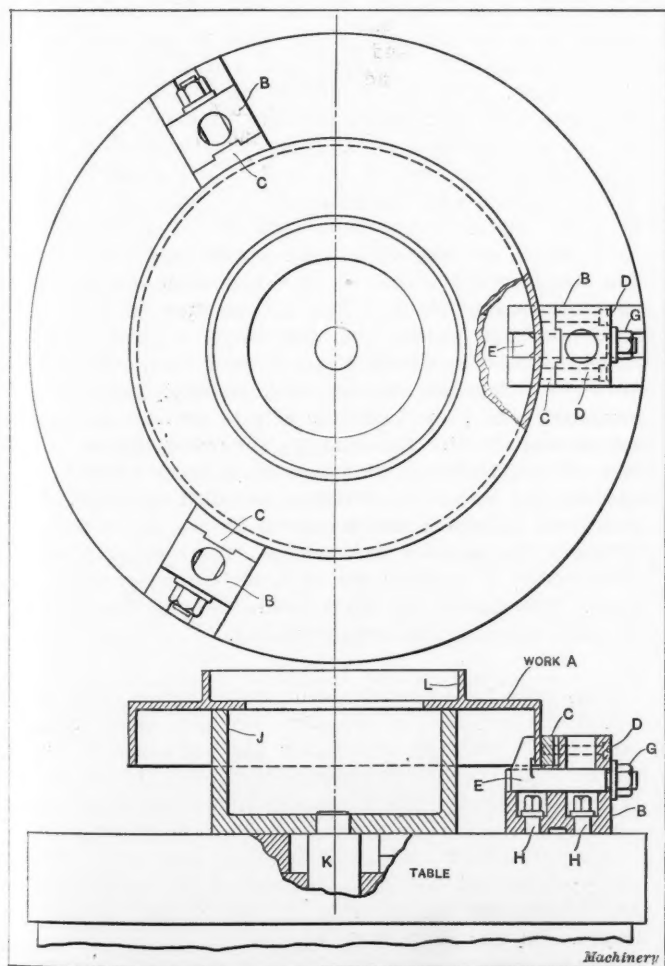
Arrangement used for holding Thin Work on the Boring Mill
